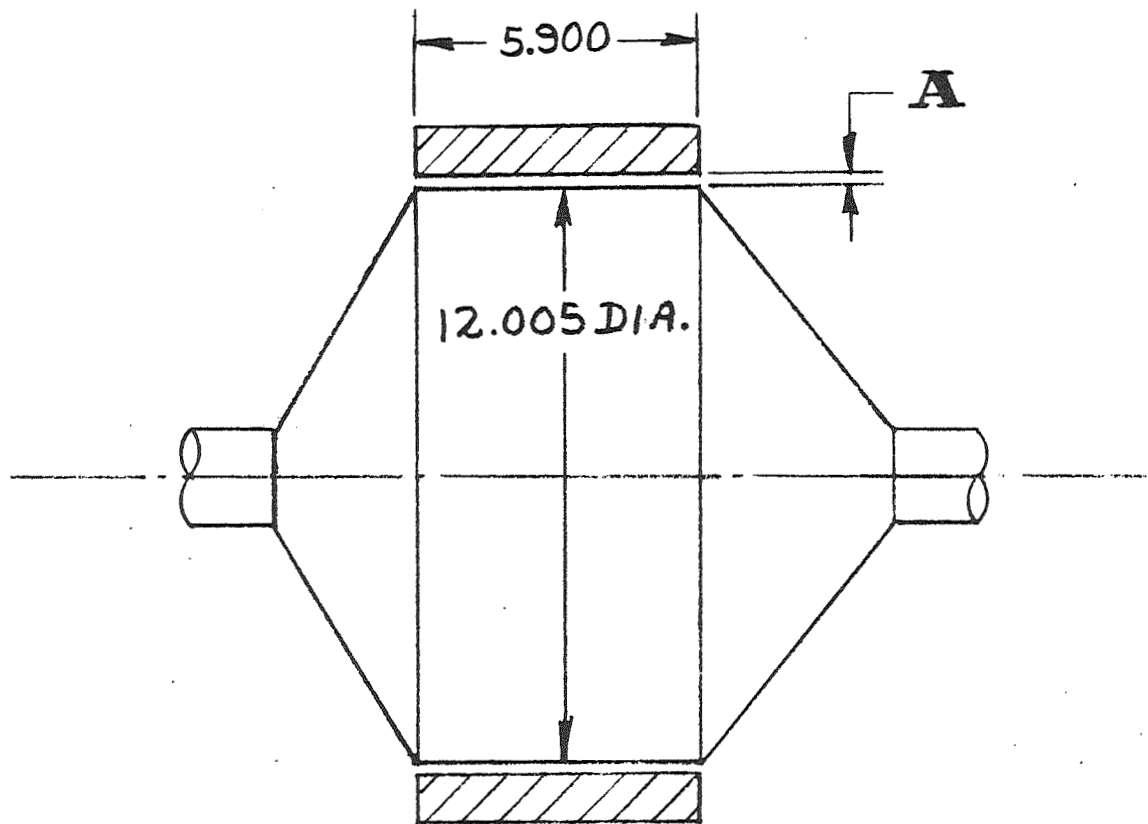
WINDAGE TEST UNIT WITH HALF THE HOUSING REMOVED
